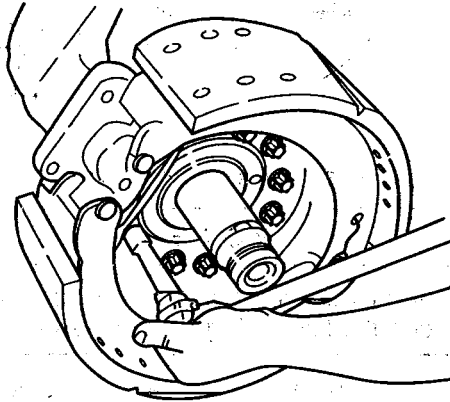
Removing "D" Washer (Shown with Wheel Removed)
